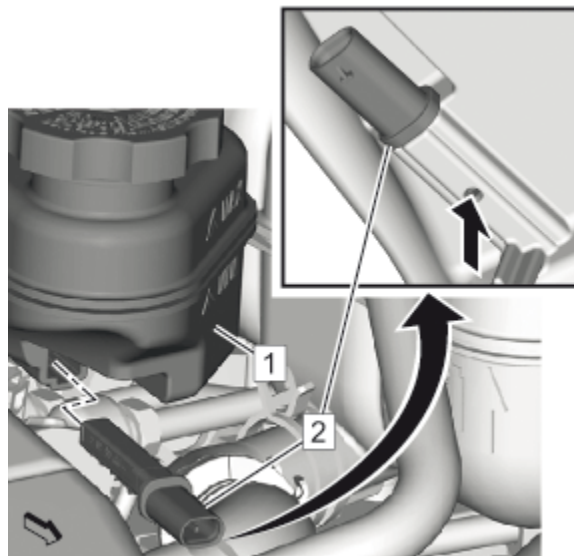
Brake Fluid Level Sensor And Brake Master Cylinder Reservoir
